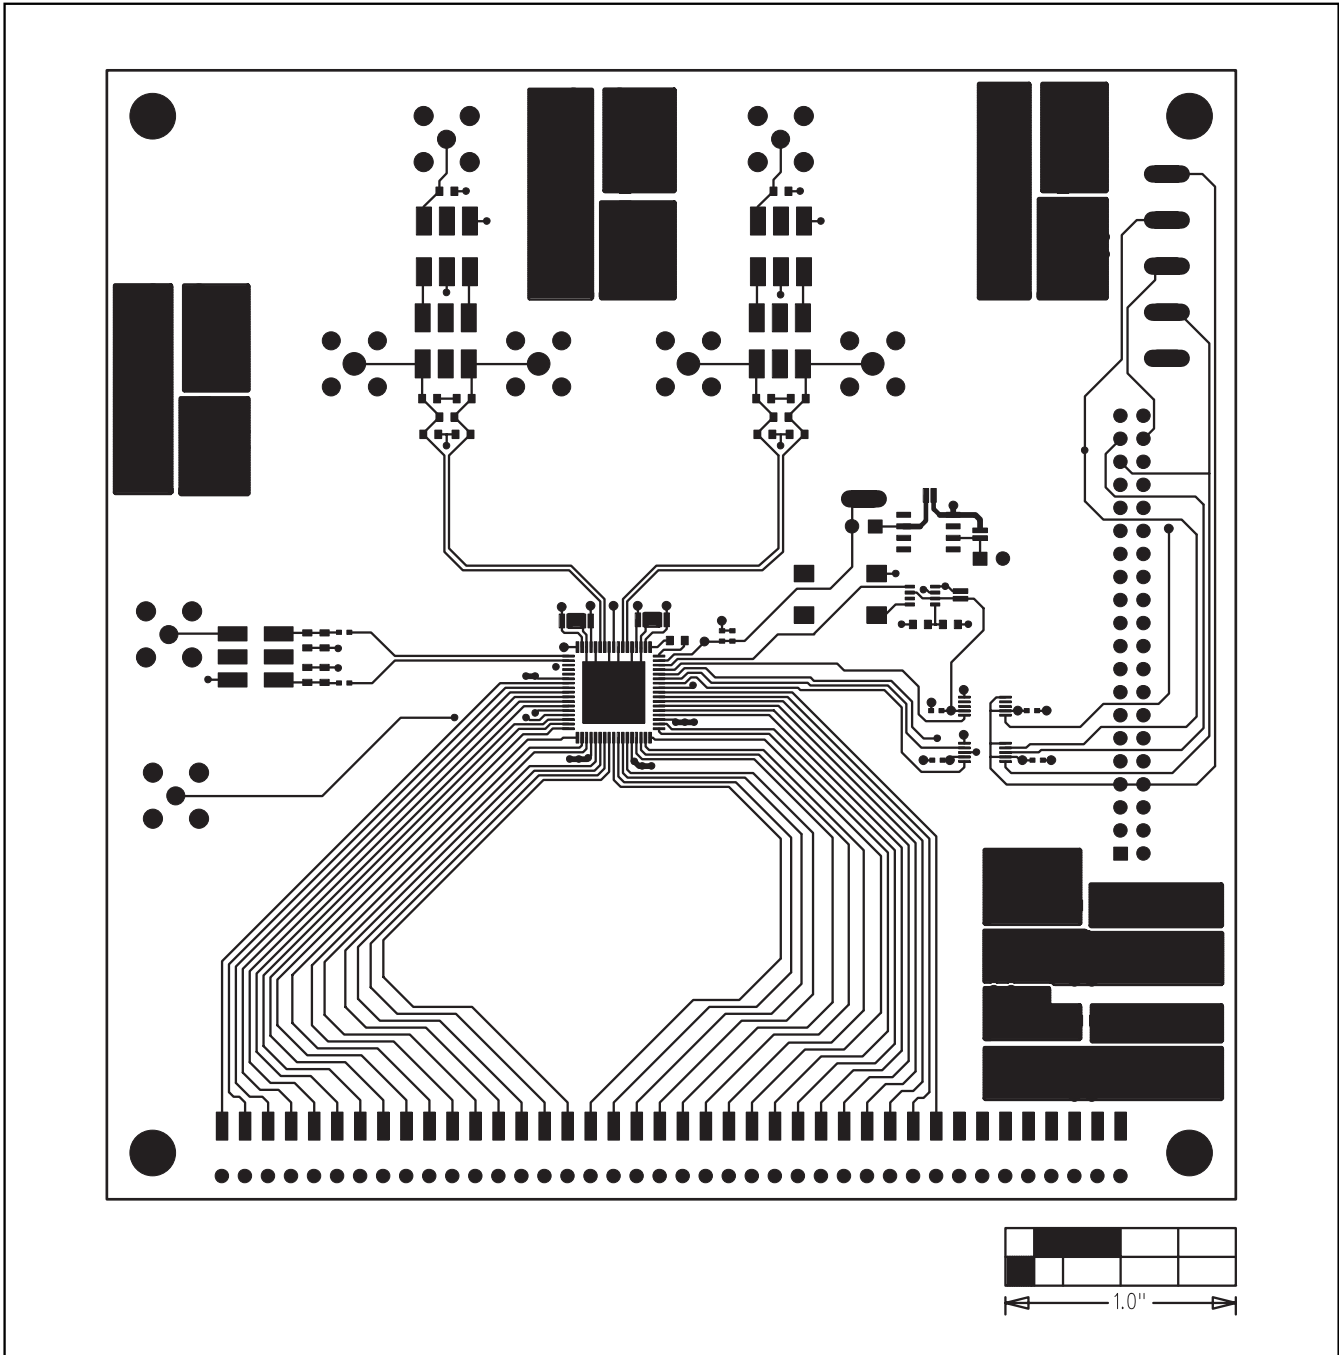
MAX5893/MAX5894/MAX5895 EV Kit PC Board Layout—Component Side
